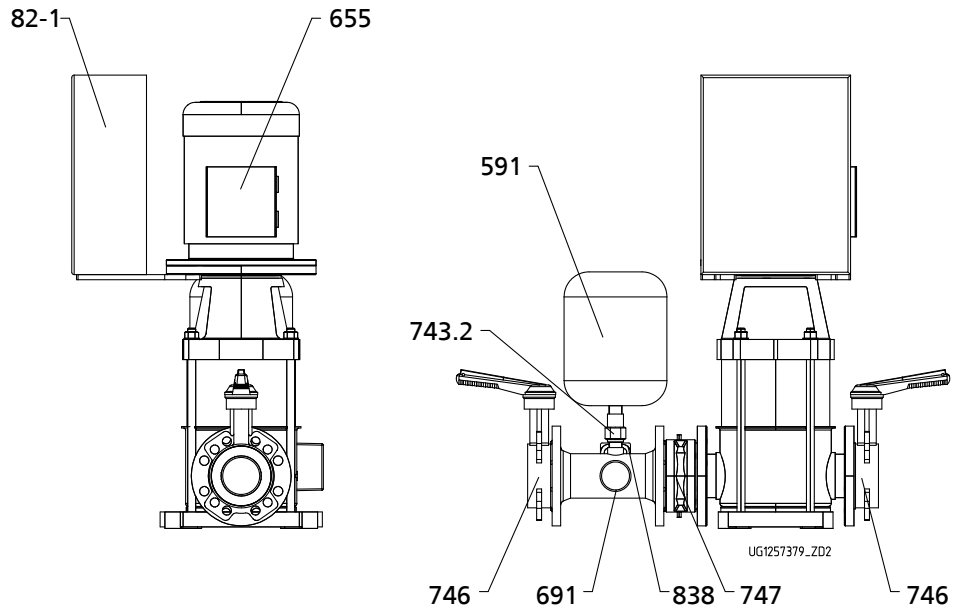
General assembly drawing of DeltaSolo D with Movitec 25, 40, 60, 90
